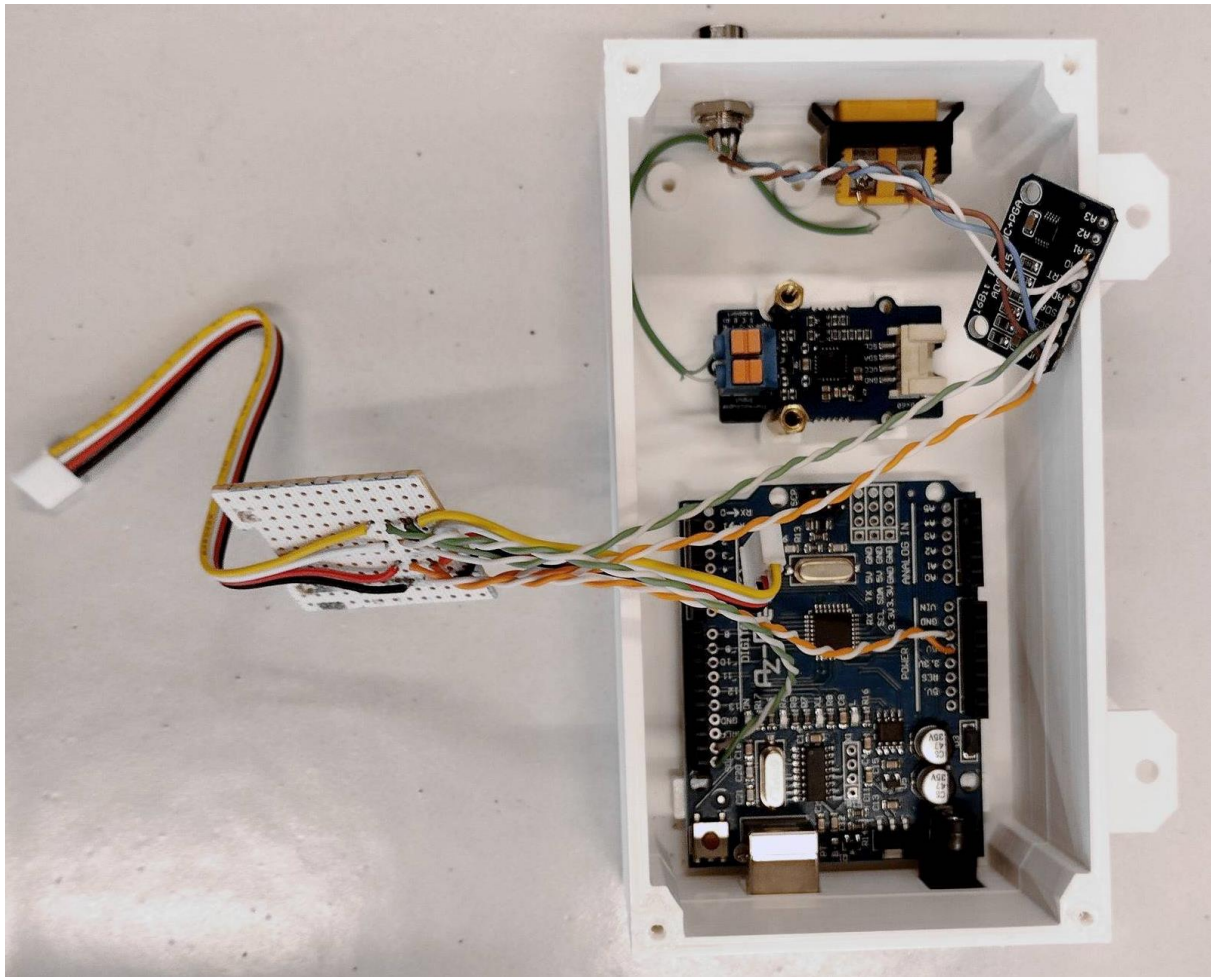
The wires are soldered to the ADS1115 board. Power can be delivered to the sensor socket by soldering both the supply wires for ADS1115 and the wires leading to the socket into the same holes (+5 V, GND) on the ADS1115 board. Proper connections are also made to the A1 input (connected to GND) and the ADDR pin (connected to +5V) in a similar manner. While these connections could also be made on the universal PCB, this approach minimizes the length of the analog signal connections which reduces potential noise in signal. The brass spacers holding the MCP9600 board are visible in the figure. The 4-wire cable, originally supplied with the MCP9600 board and terminated with 4-pin connectors, was cut in half. Both halves were then soldered to the universal PCB, providing a connection to the MCP9600 board and a detachable connection to the LCD display. Note that the connectors on the LCD I²C adapter may need to be slightly bent to allow proper connection with this 4-wire cable connector. After assembling the components, double-check all connections before performing a power-up test. For the test, it is recommended to use a regulated power supply with a current limit set to 50 mA or lower. The “VIN” pin can be used to supply the circuit with 5V, as well as the round power socket.
